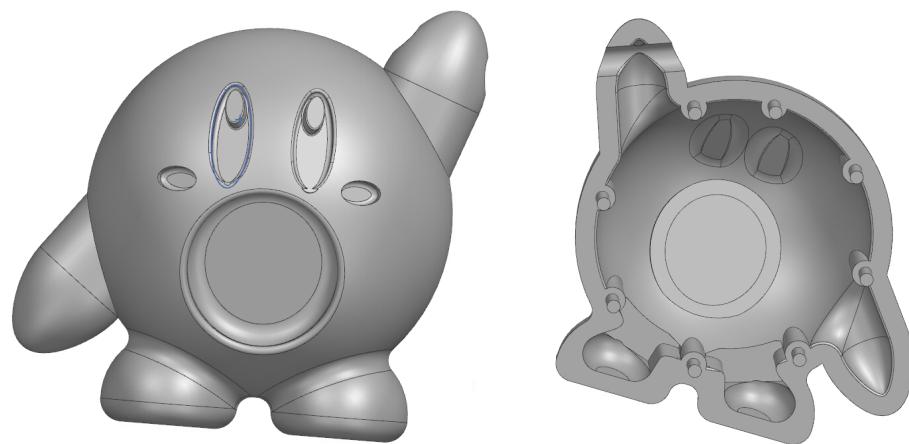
Kirby Front side to be put machining pins (left) and back (right)
